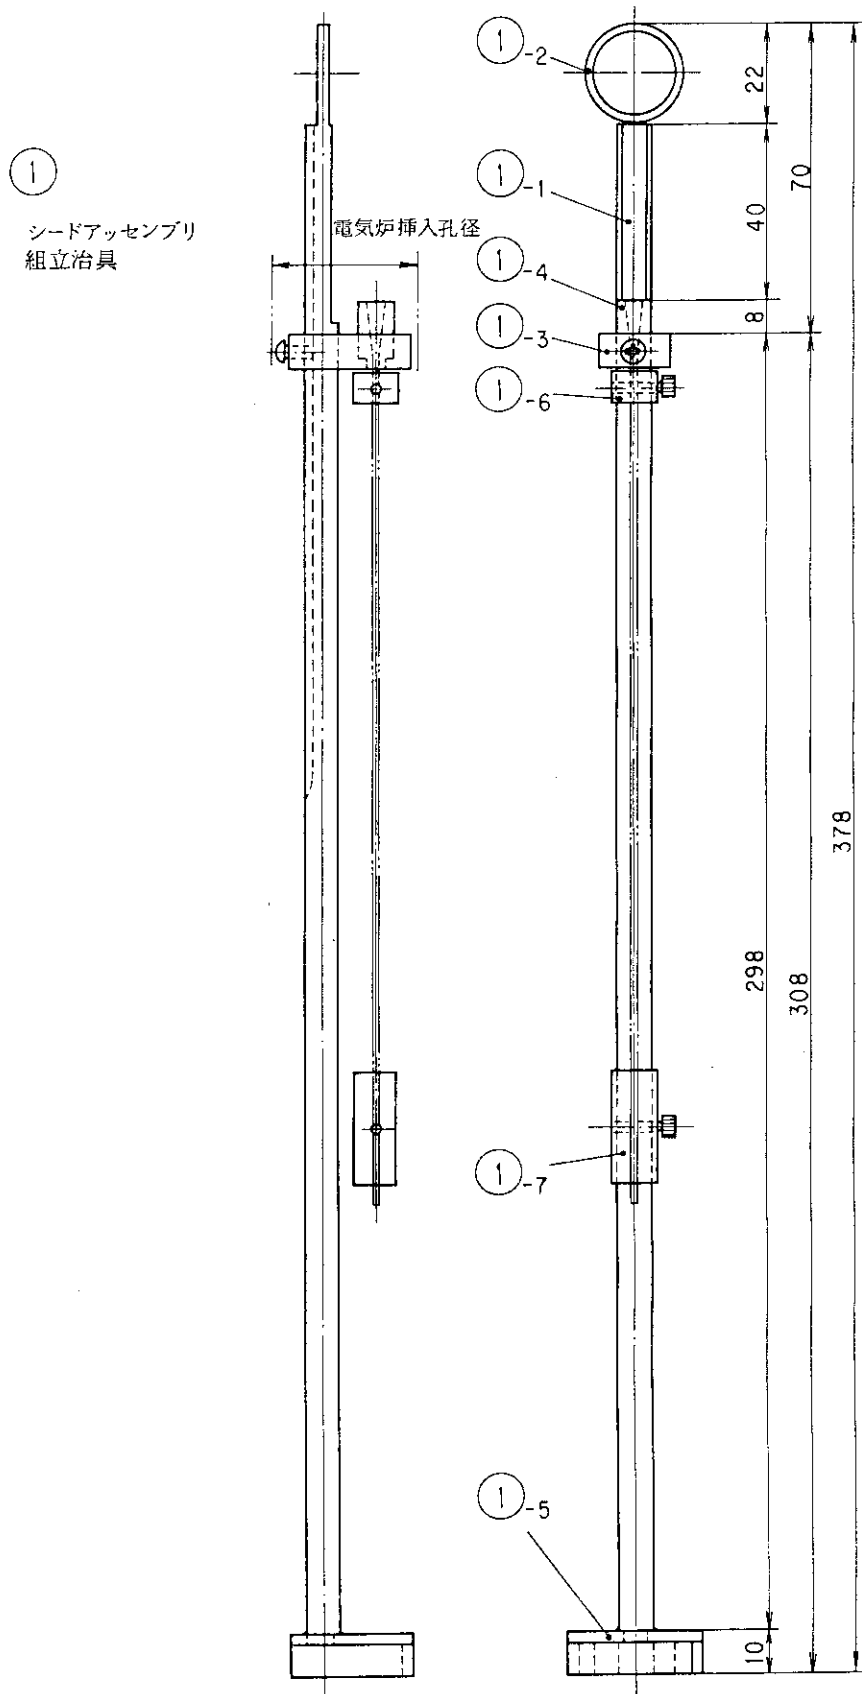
Assembly jig for  $^{192}\text{Ir}$  seed assembly
